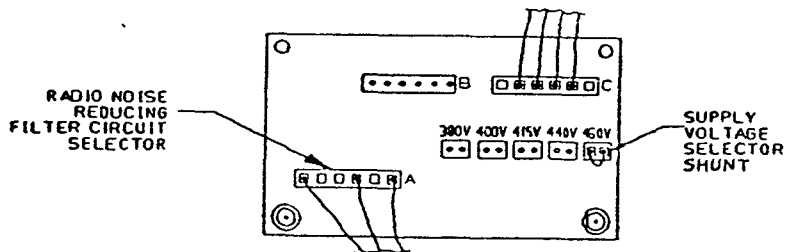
B. Voltage Selecting PC Board (3PCB), in 460V Units.
